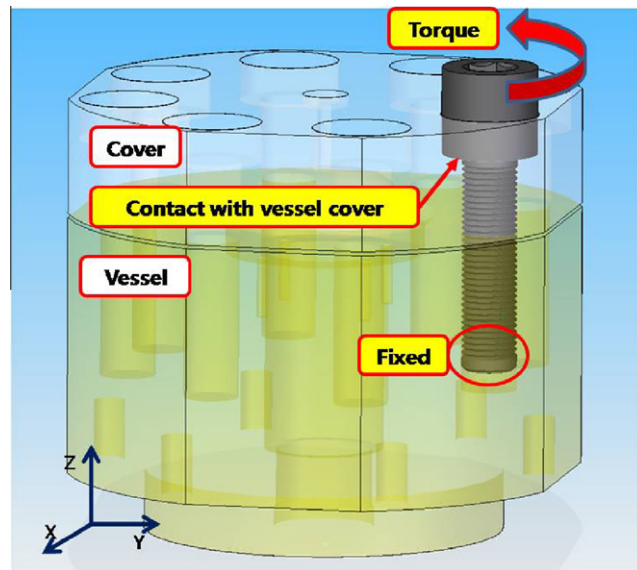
FE model of the pressure vessel bolt with considering loose parts in the thread hole.
